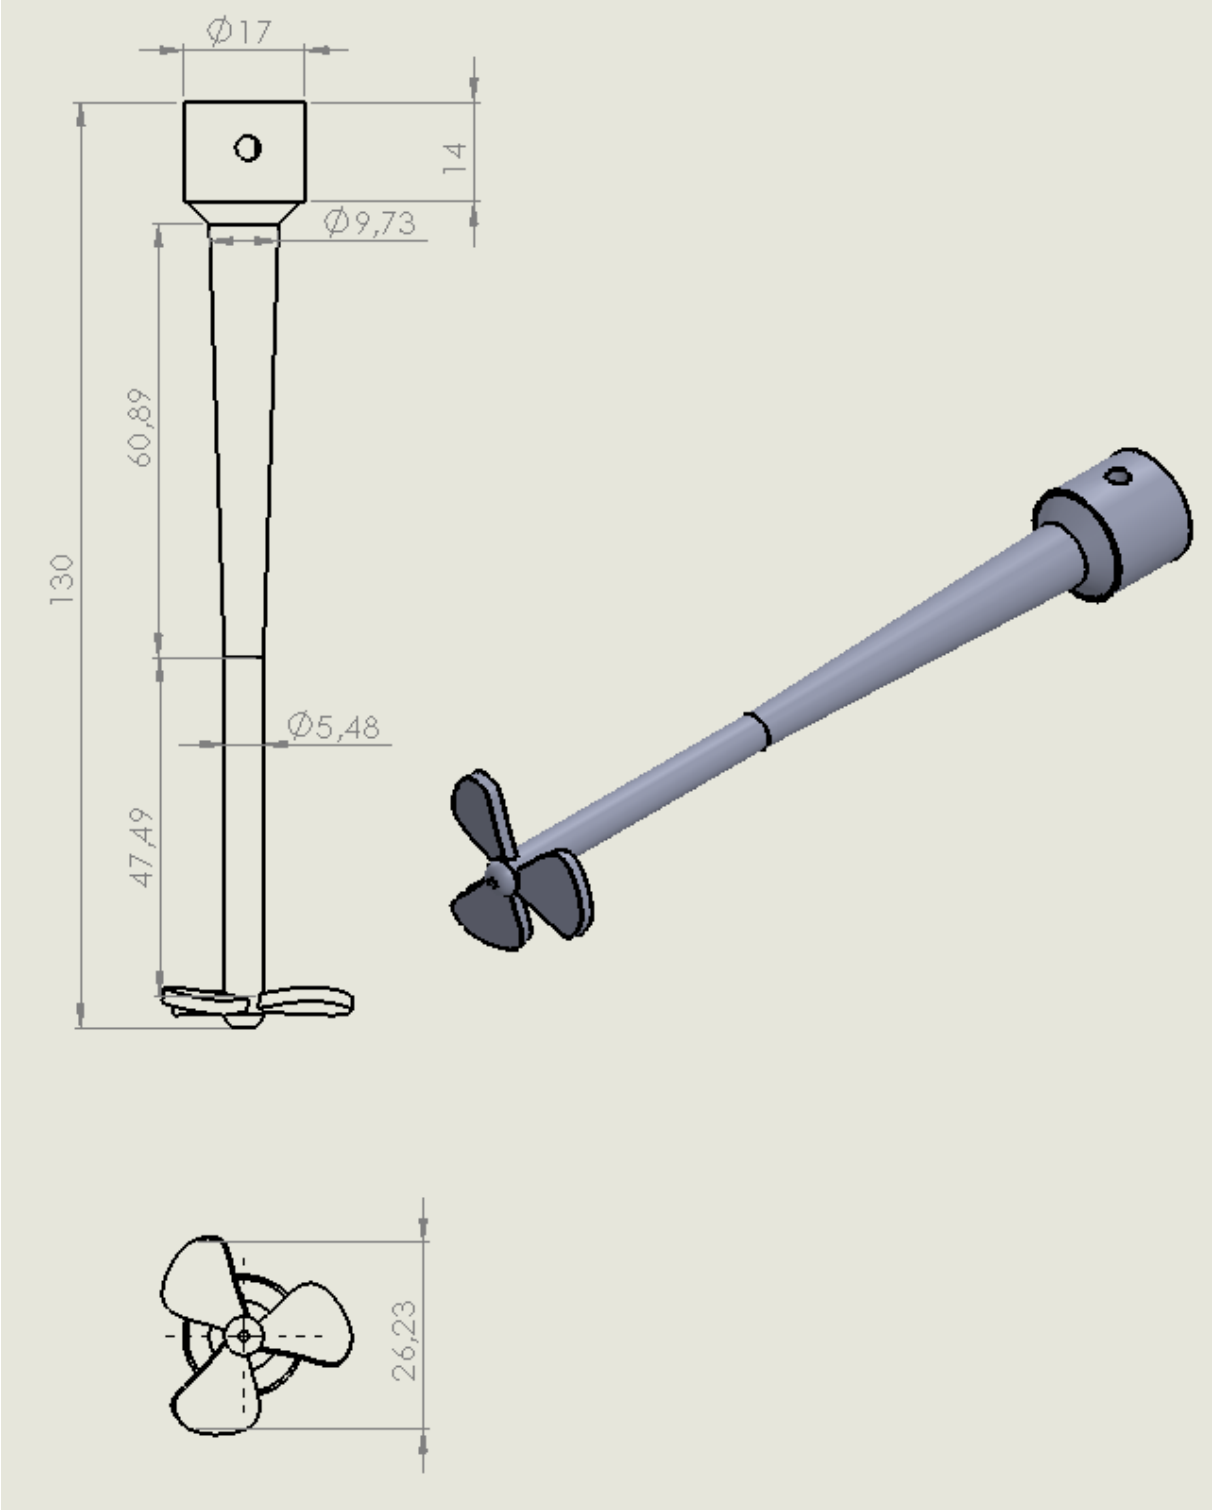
Drawing of the «DC motor propeller» with dimensions.
